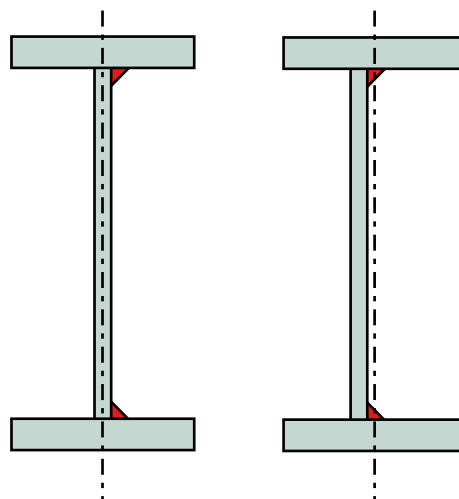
Use a symmetrical welding sequence.
